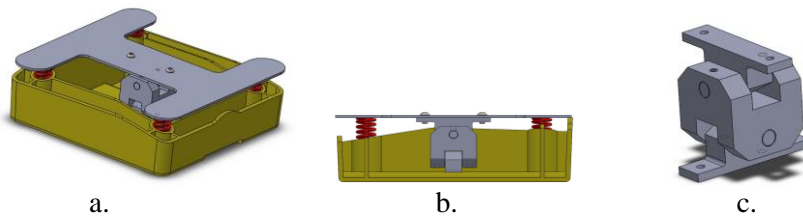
3D model of the seat tilting mechanism: a. mechanism assembly; b. cross section of the mechanism housing; c. main joint
